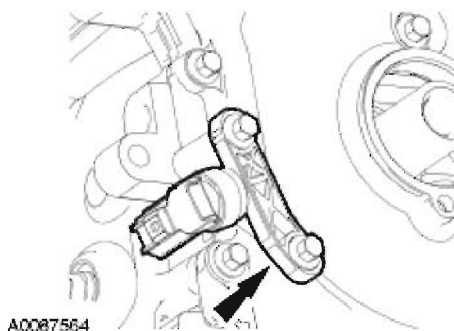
Identifying Special Camshaft Tool (303-465)
